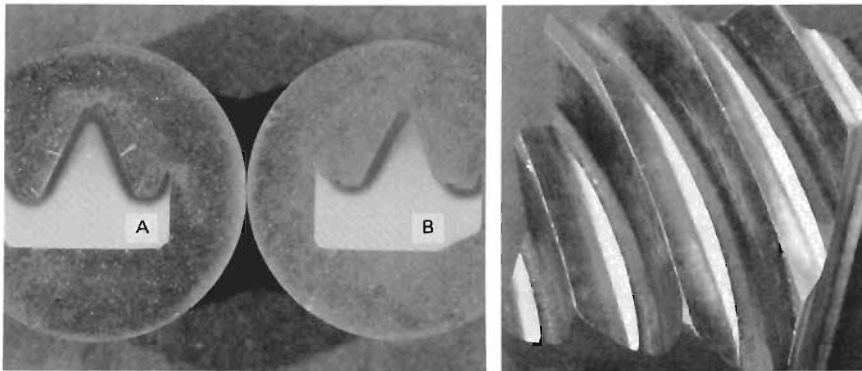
Spiral bevel gear teeth showing contact wear. Insert A is a tooth area nonworn. Insert B shows abrasive wear clearly cutting away 1/8 in. of the surface without damage to underlying material.
